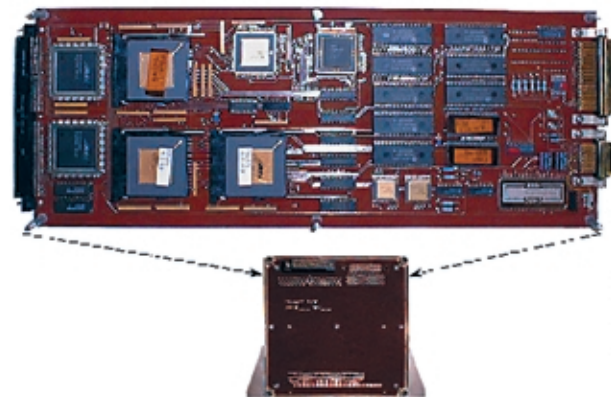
Relative size reduction using COB fabrication shown in Fig. 1b. The two boards hold identical electrical designs, the upper being an electrical breadboard for testing the design built using current APL multilayer board processes.
